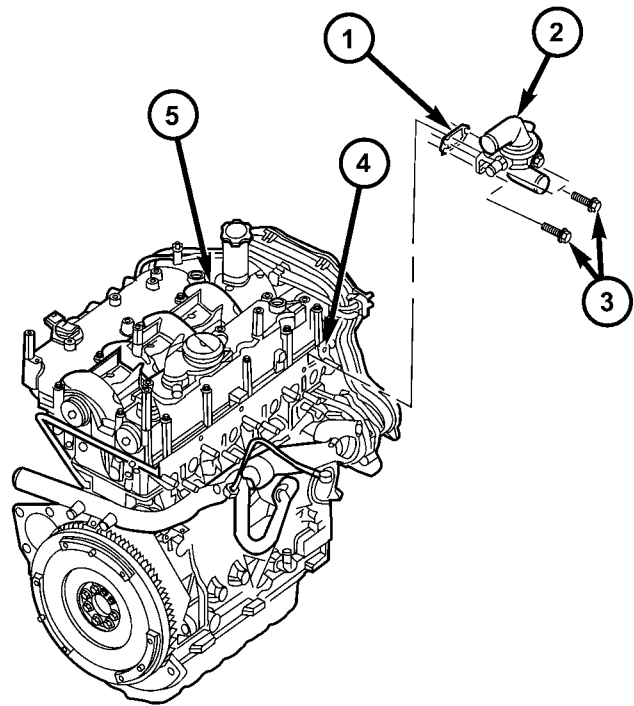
THERMOSTAT HOUSING ASSEMBLY
